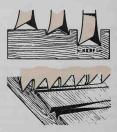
How the teeth of a saw cut. (H, K, Porter Co.)
